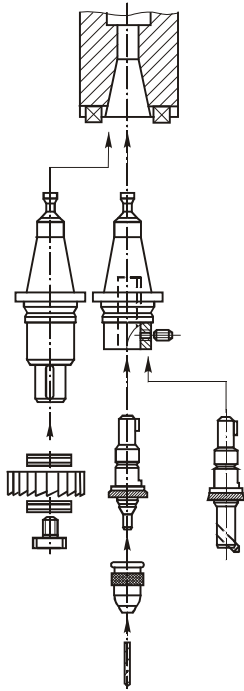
Tooling system for CNC machines of drilling-milling-boring type
